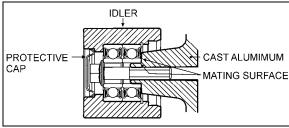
IDLER MOUNTED ON THE CAST ALUMINUM SUPPORT
